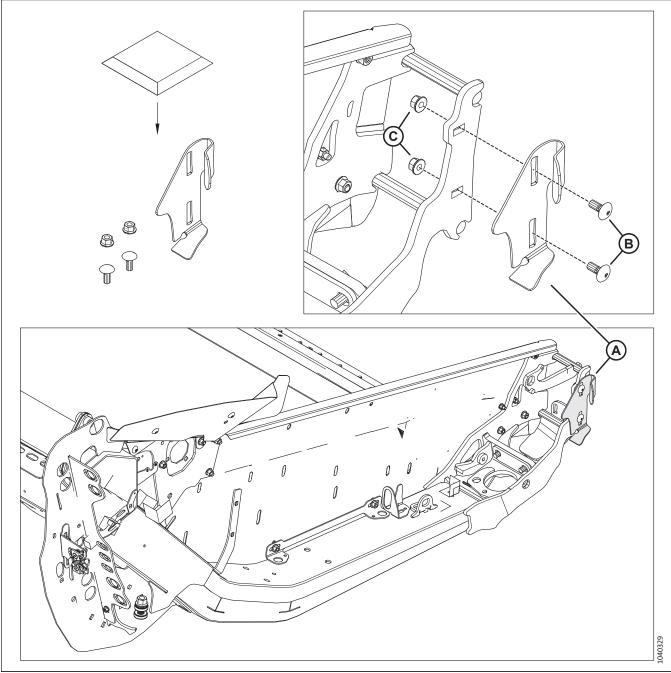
Front Support Installation, Parts Bag MD #357468
